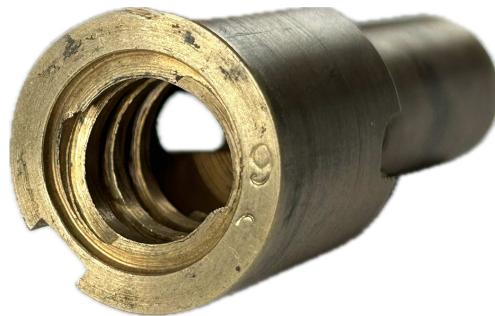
Square thread of steam nozzle. *Double start feature.
